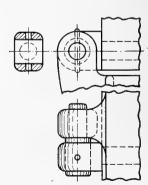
Wrong method of fastening steel lug, requiring cut try. End view shows results.
